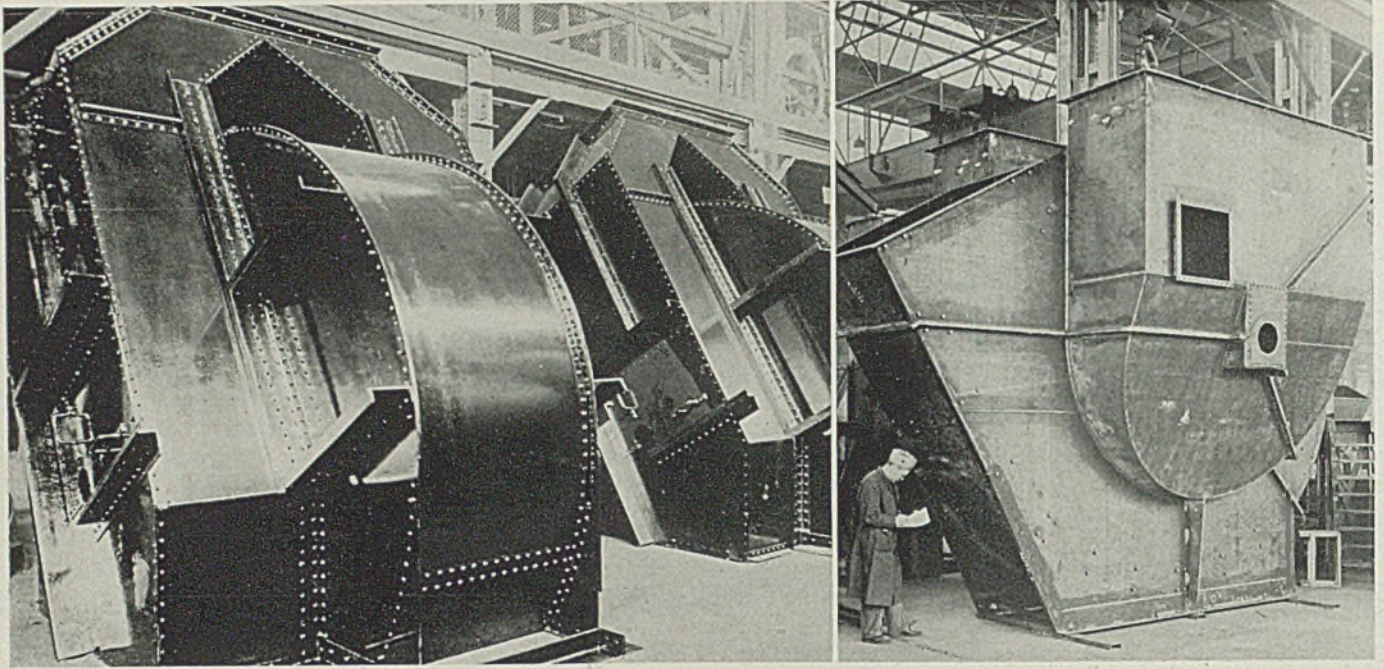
(Left, above)—Sintering plant fan of 1918 design with bracing to hold light plate then used
